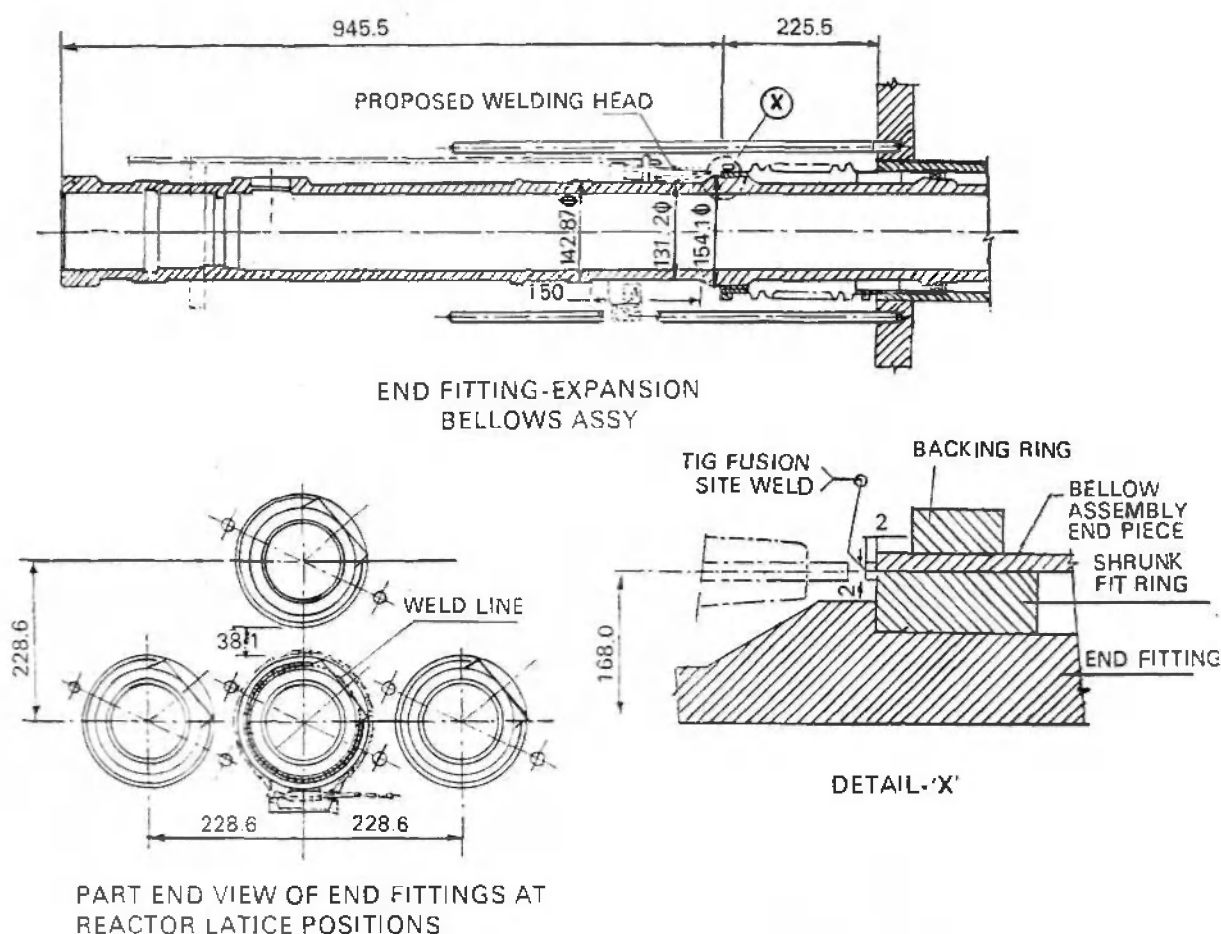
Details of bellows—welding arrangement for NAPP reactor
